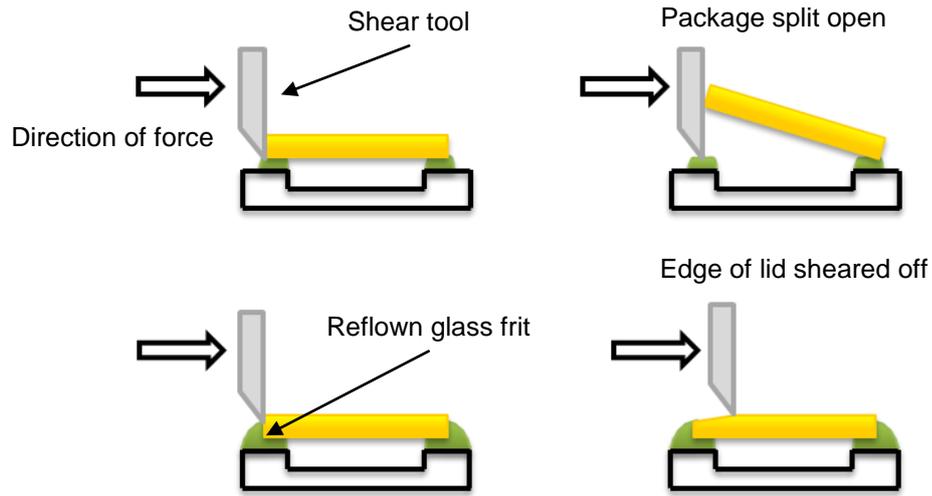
Sketch of shear force test produce. Top: Package is split open during testing; bottom: shear tool slipping and shearing off edge of lid due to reflow glass frit.
